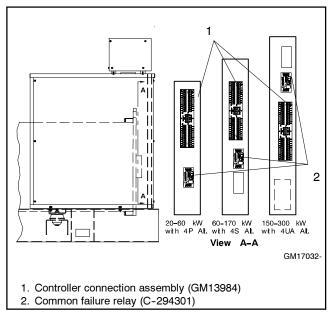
Controller Connection Assembly Mounting Locations in Junction Box (20–300 kW)
